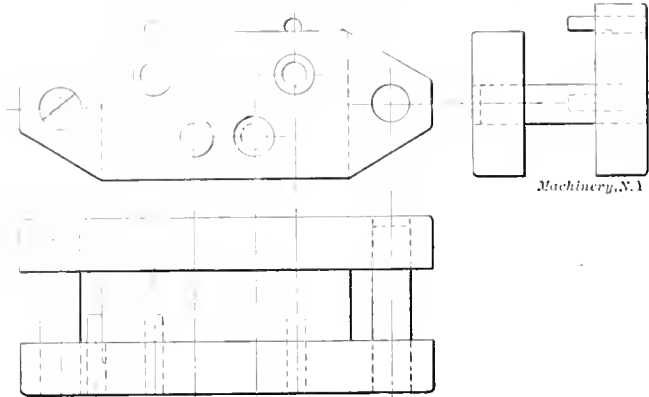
Jig in Fig. 84 Improved by adding Locating Pins.
